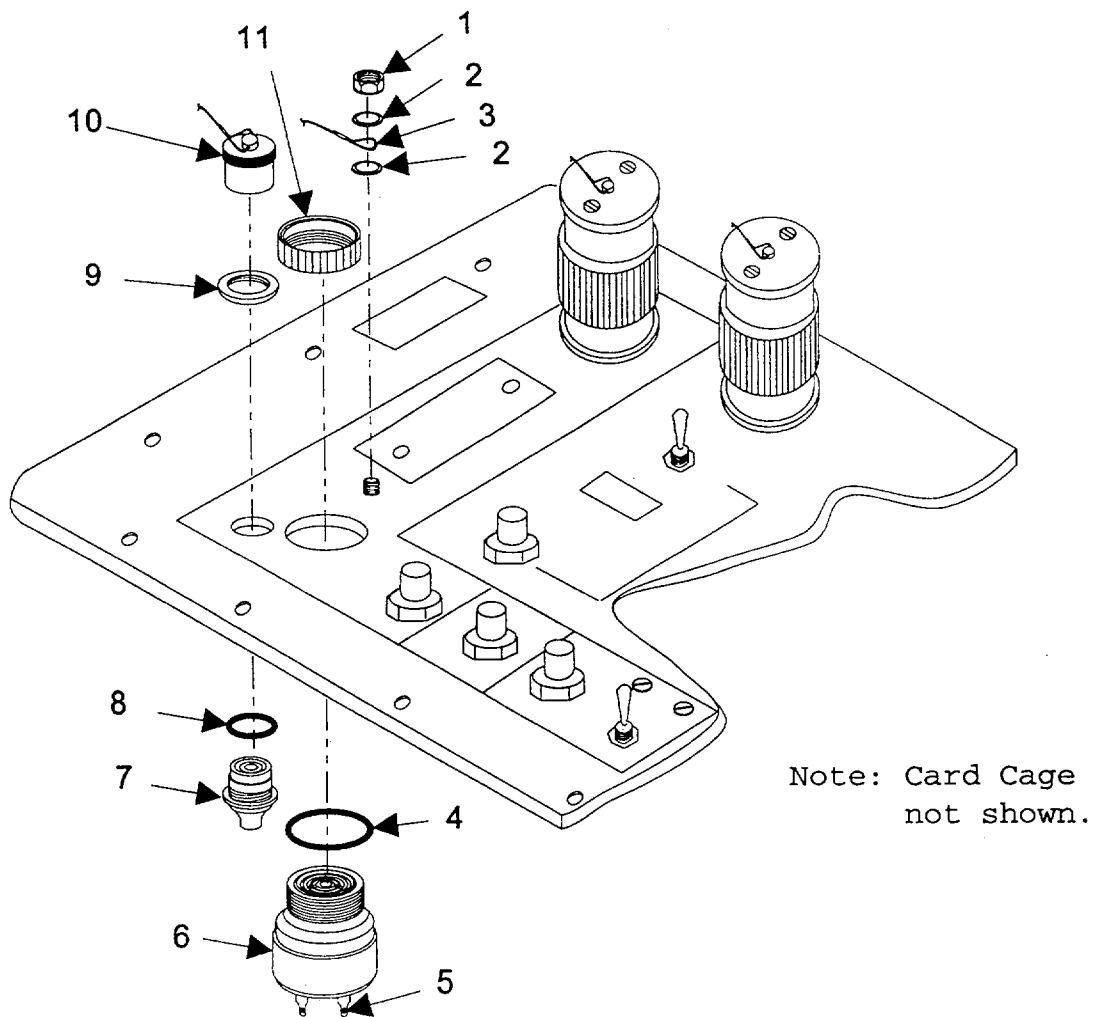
Audible Alarm and Electrical Connector Replacement.
